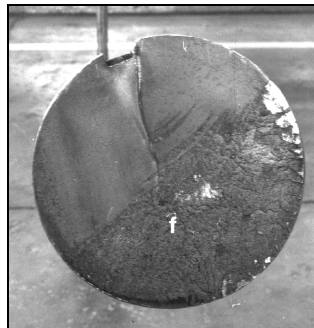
Photograph of Typical Pump Fracture Surface Rotor Side
